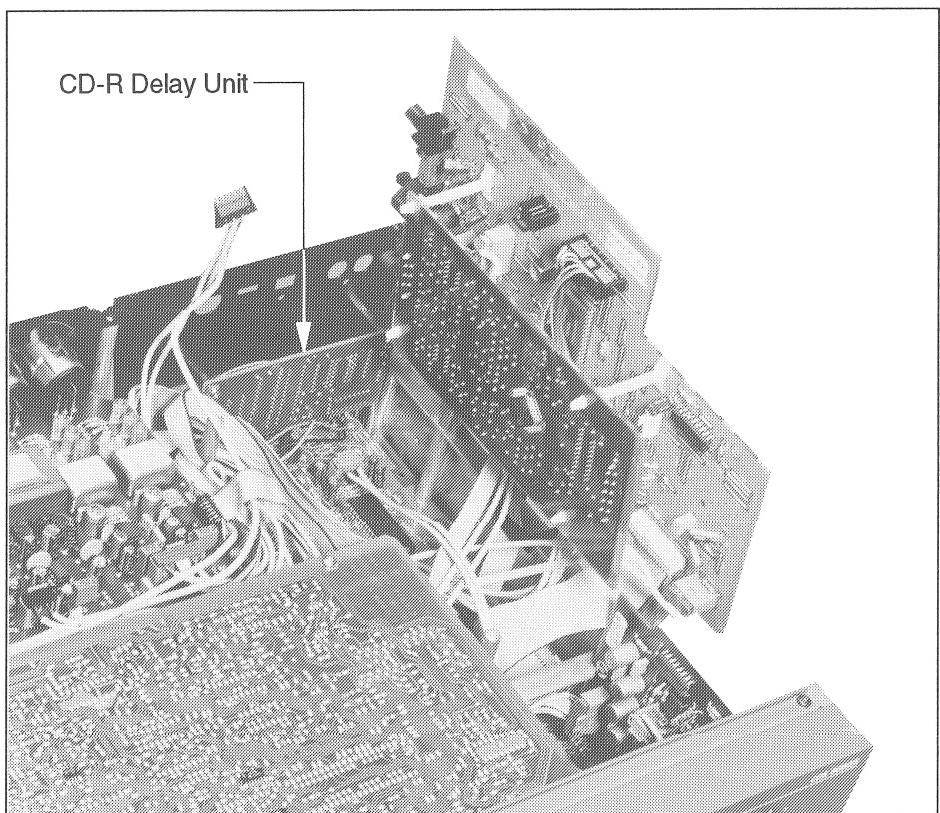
CDR delay unit installed in the D740 CD recorder. Front top view.
